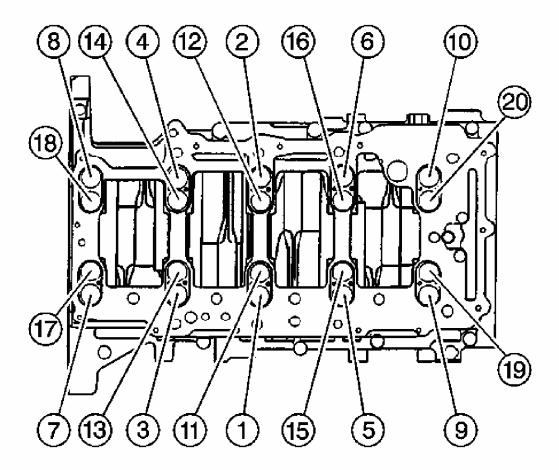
Identifying Lower Crankcase Bolts Tightening Sequence Courtesy of GENERAL MOTORS CORP.
